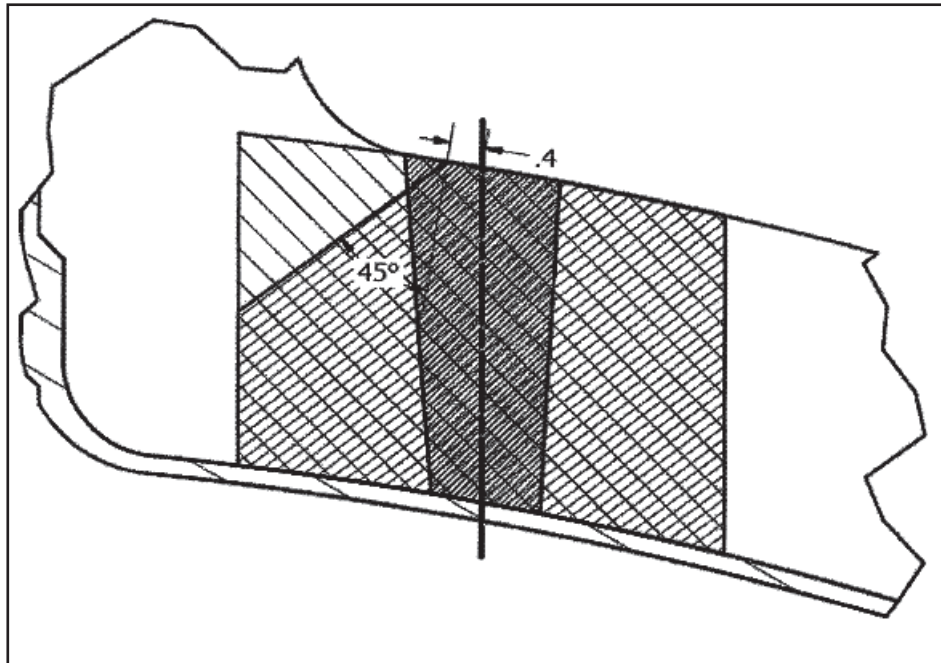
Weld WP-12, 45° Head Side Axial Scans
